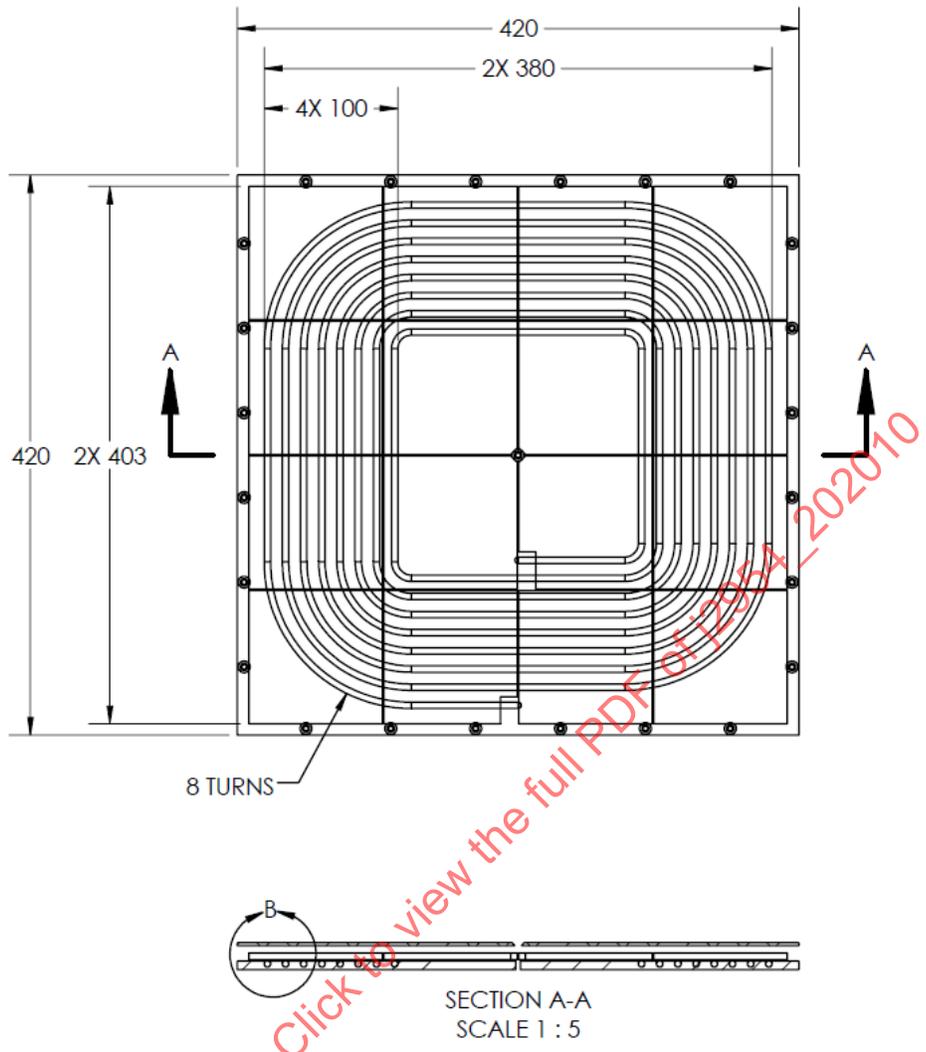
Mechanical dimensions of the Test Station VA WPT2/Z3
